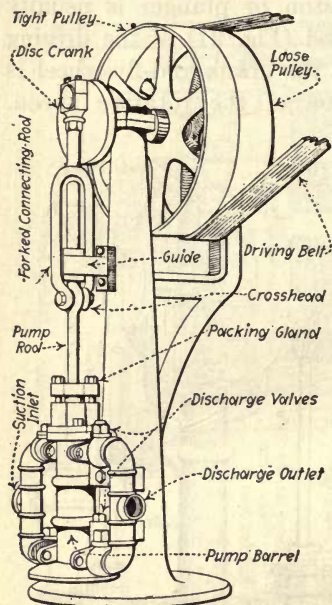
A Belt-Driven Double-Acting Pump For Boiler Feeding.
